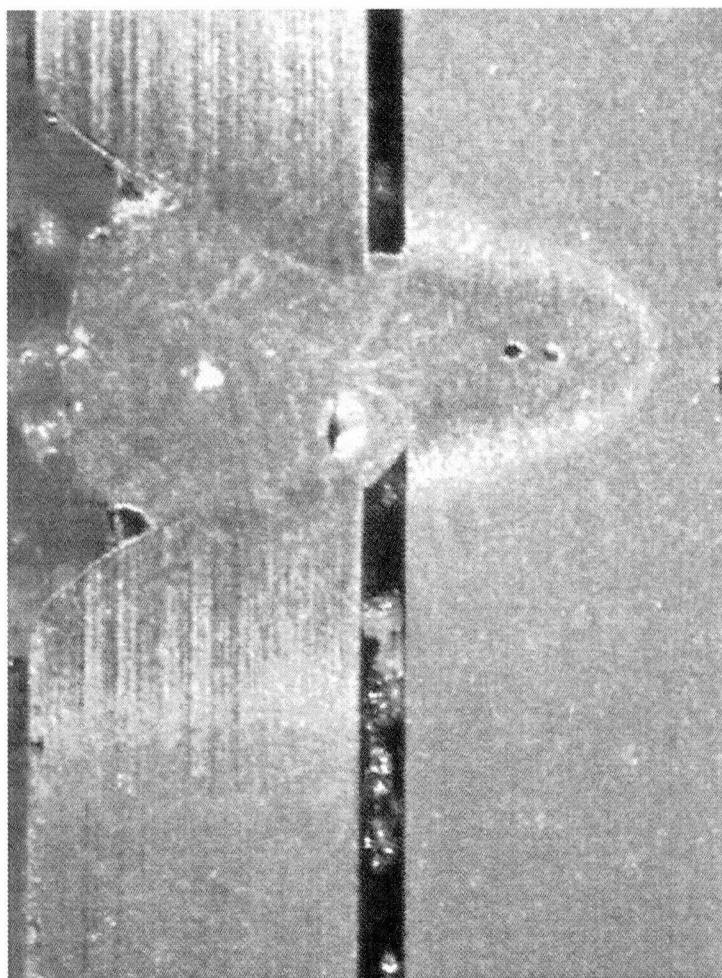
PALW Undercut Example. Weld performed on 80Y90T using PALW (2500W, 75A, 2000mm/min., +1 focal position, 8.6% gap).
